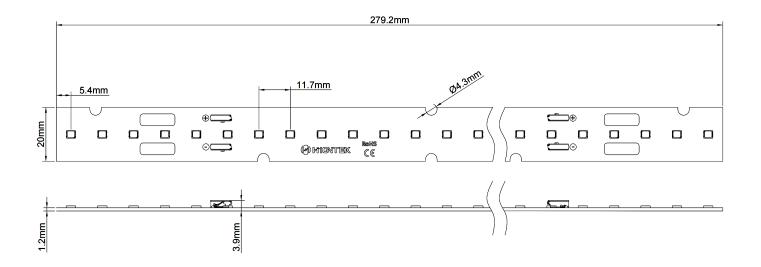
Mechanical Dimensions for HIGNTEK HUL-280SA-036024.
